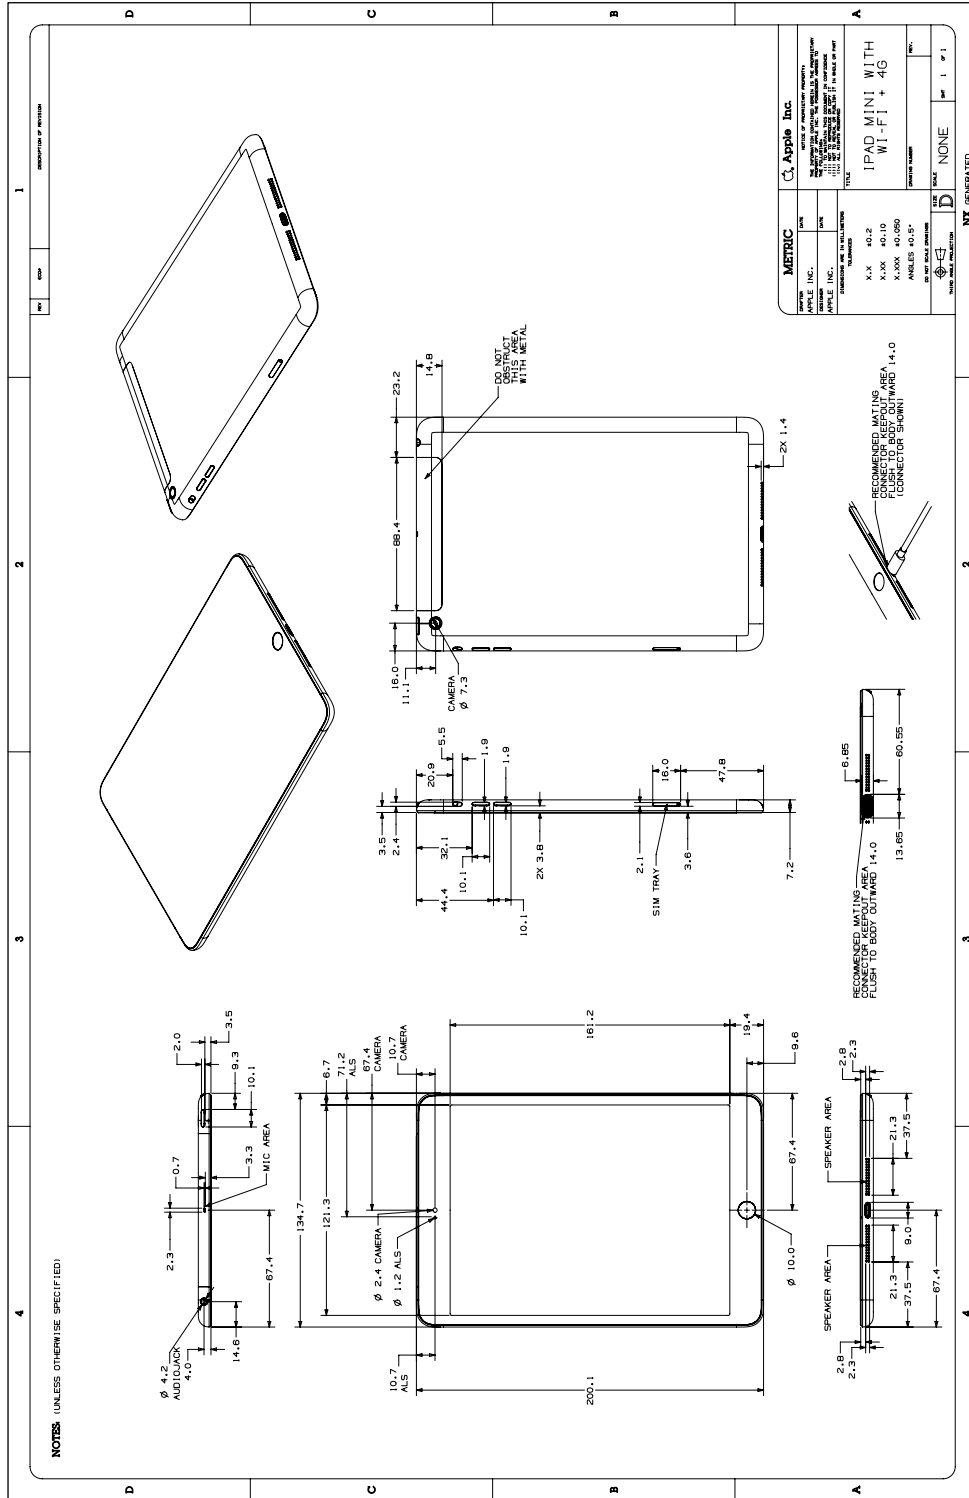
iPad mini with Wi-Fi Dimensional Drawing
